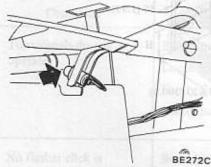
Trunk Room Lamp Switch (Sedan)
